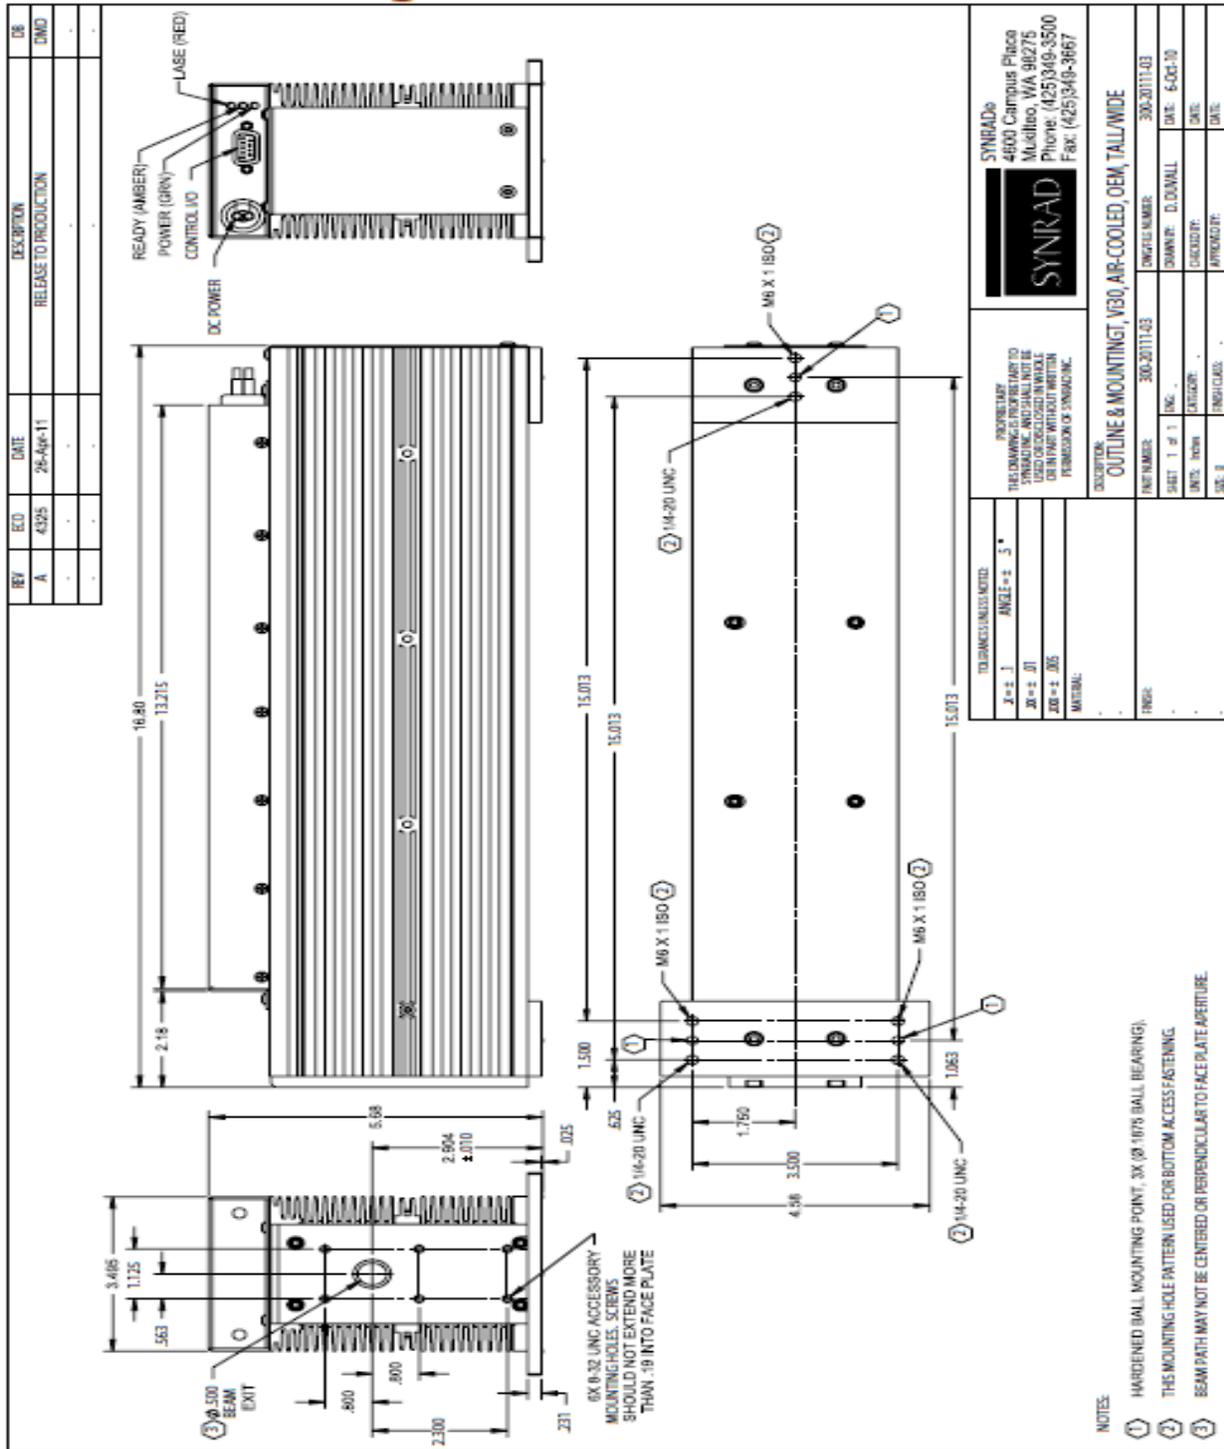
OEM vi30 package outline and mounting dimensions with optional customer-installed 'Tall/Wide' mounting feet.
